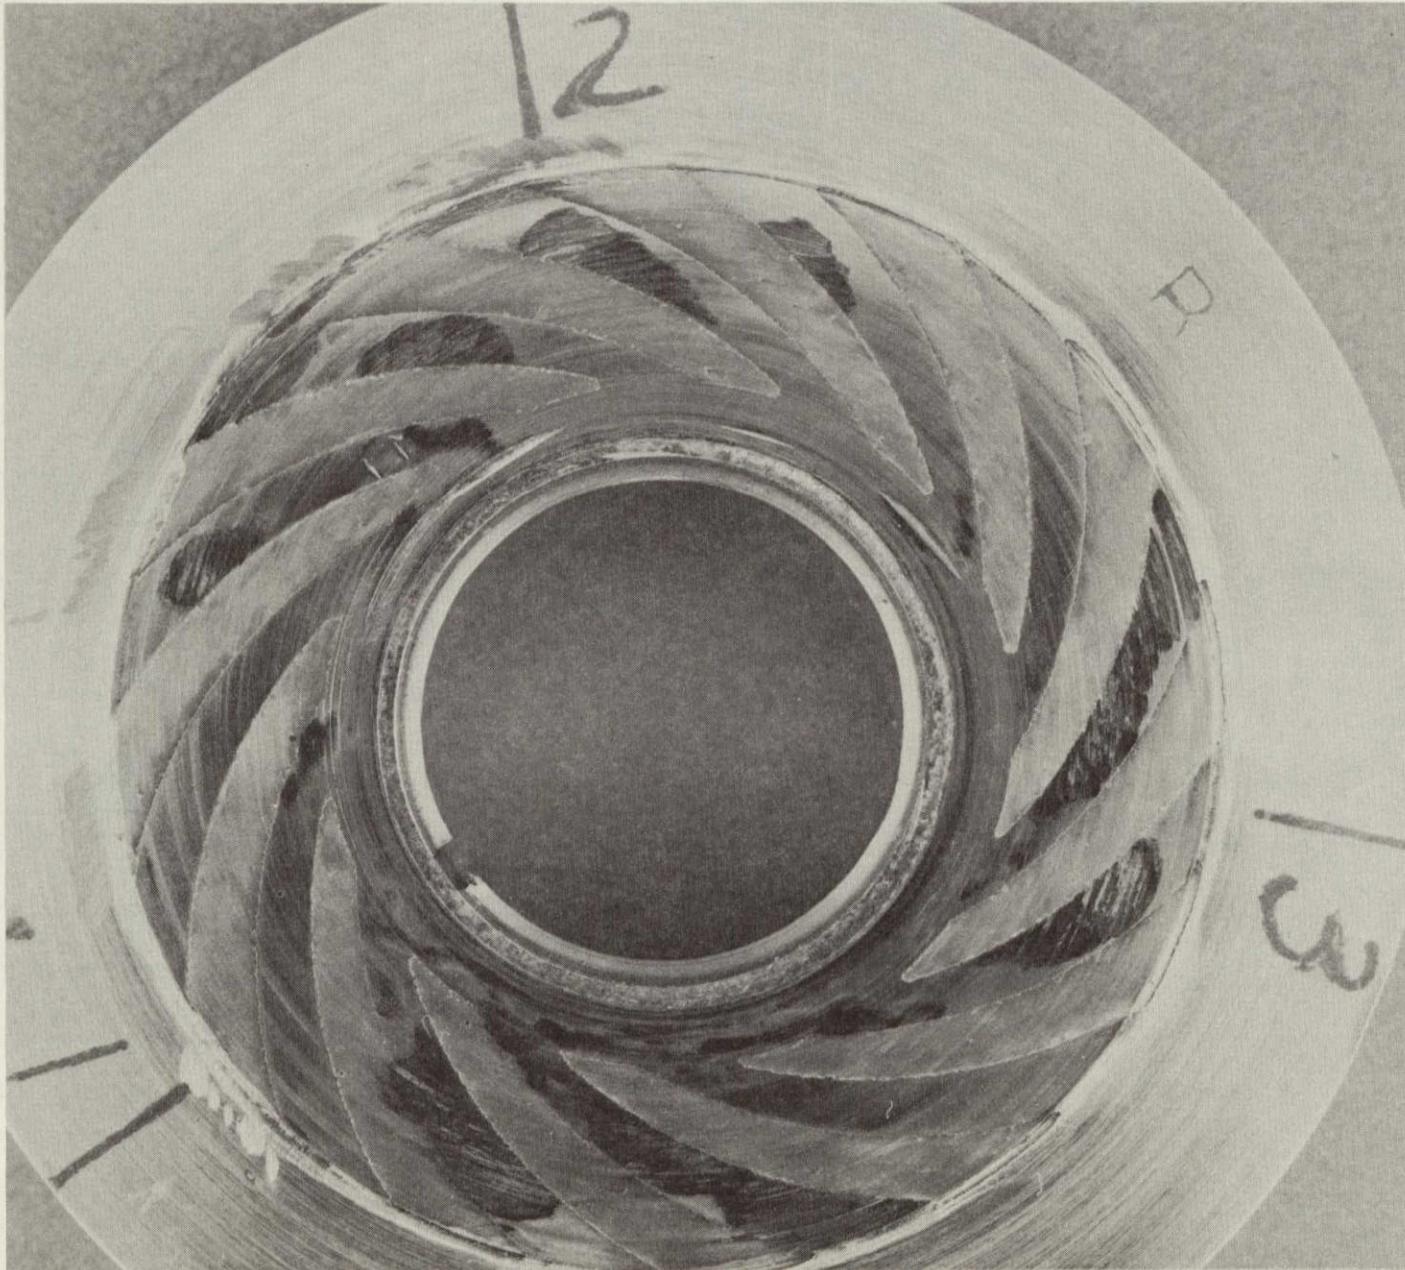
Spiral Groove LOX Seal Mate Ring, Some Carbon Pieces, and Housing (Build 8, Posttest 332)
